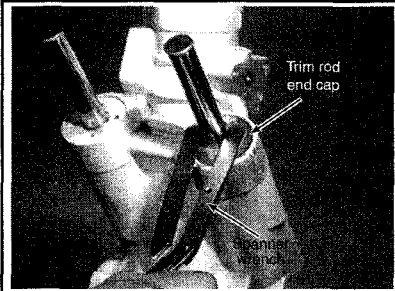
Use a universal spanner to loosen and back out each trim rod end cap from the trim cylinder
